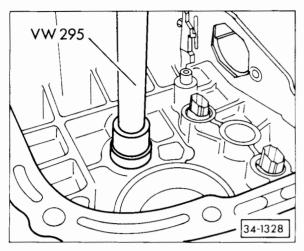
Driving needle bearing into gearbox housing as far as it will go
